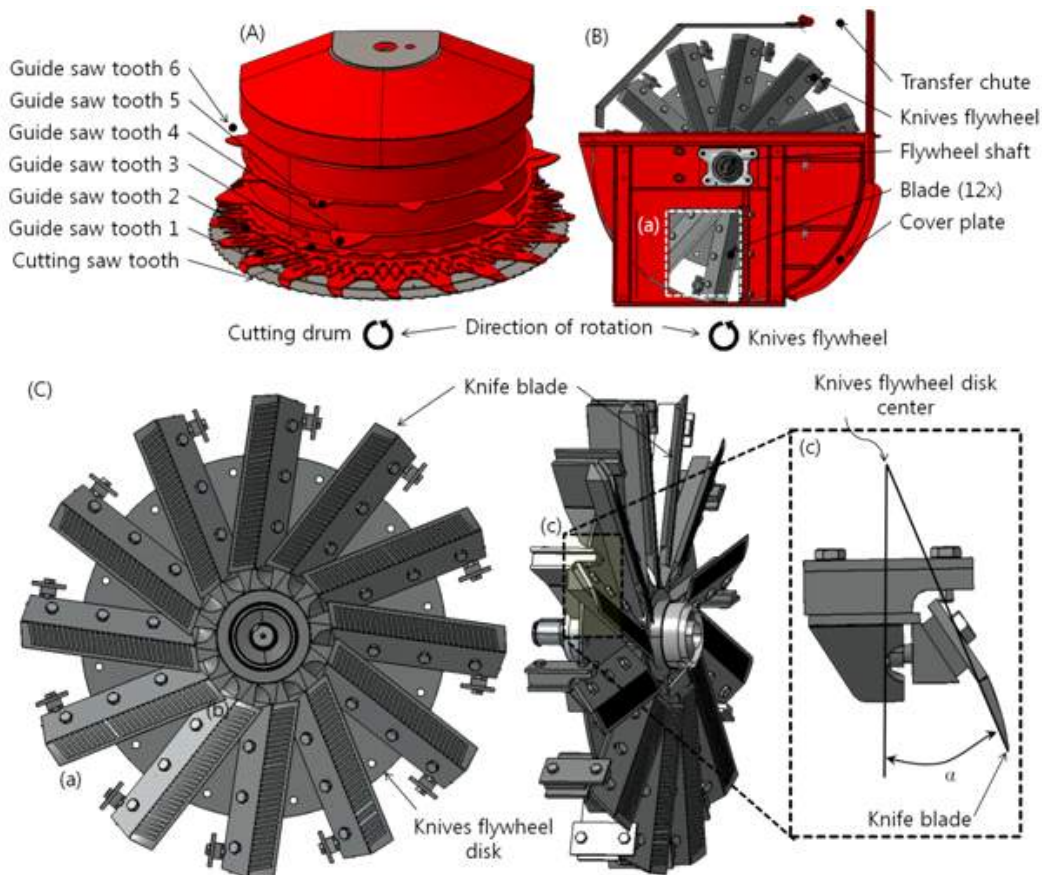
Cutting mechanism of silage corn harvester: (A) cutting drum device, (B) knives flywheel device, and (C) knives flywheel without cover plate and cutting angle of knife blade
